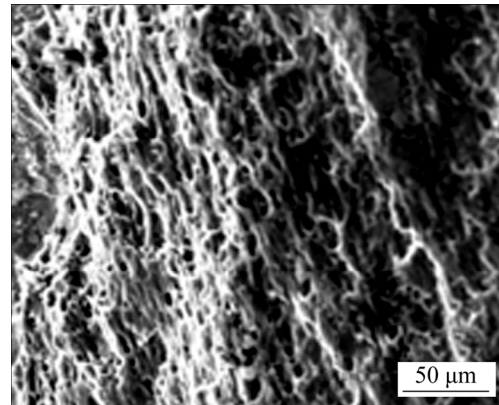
Fracture surface of Al 5052–SS 304–SS 316 explosive clad
